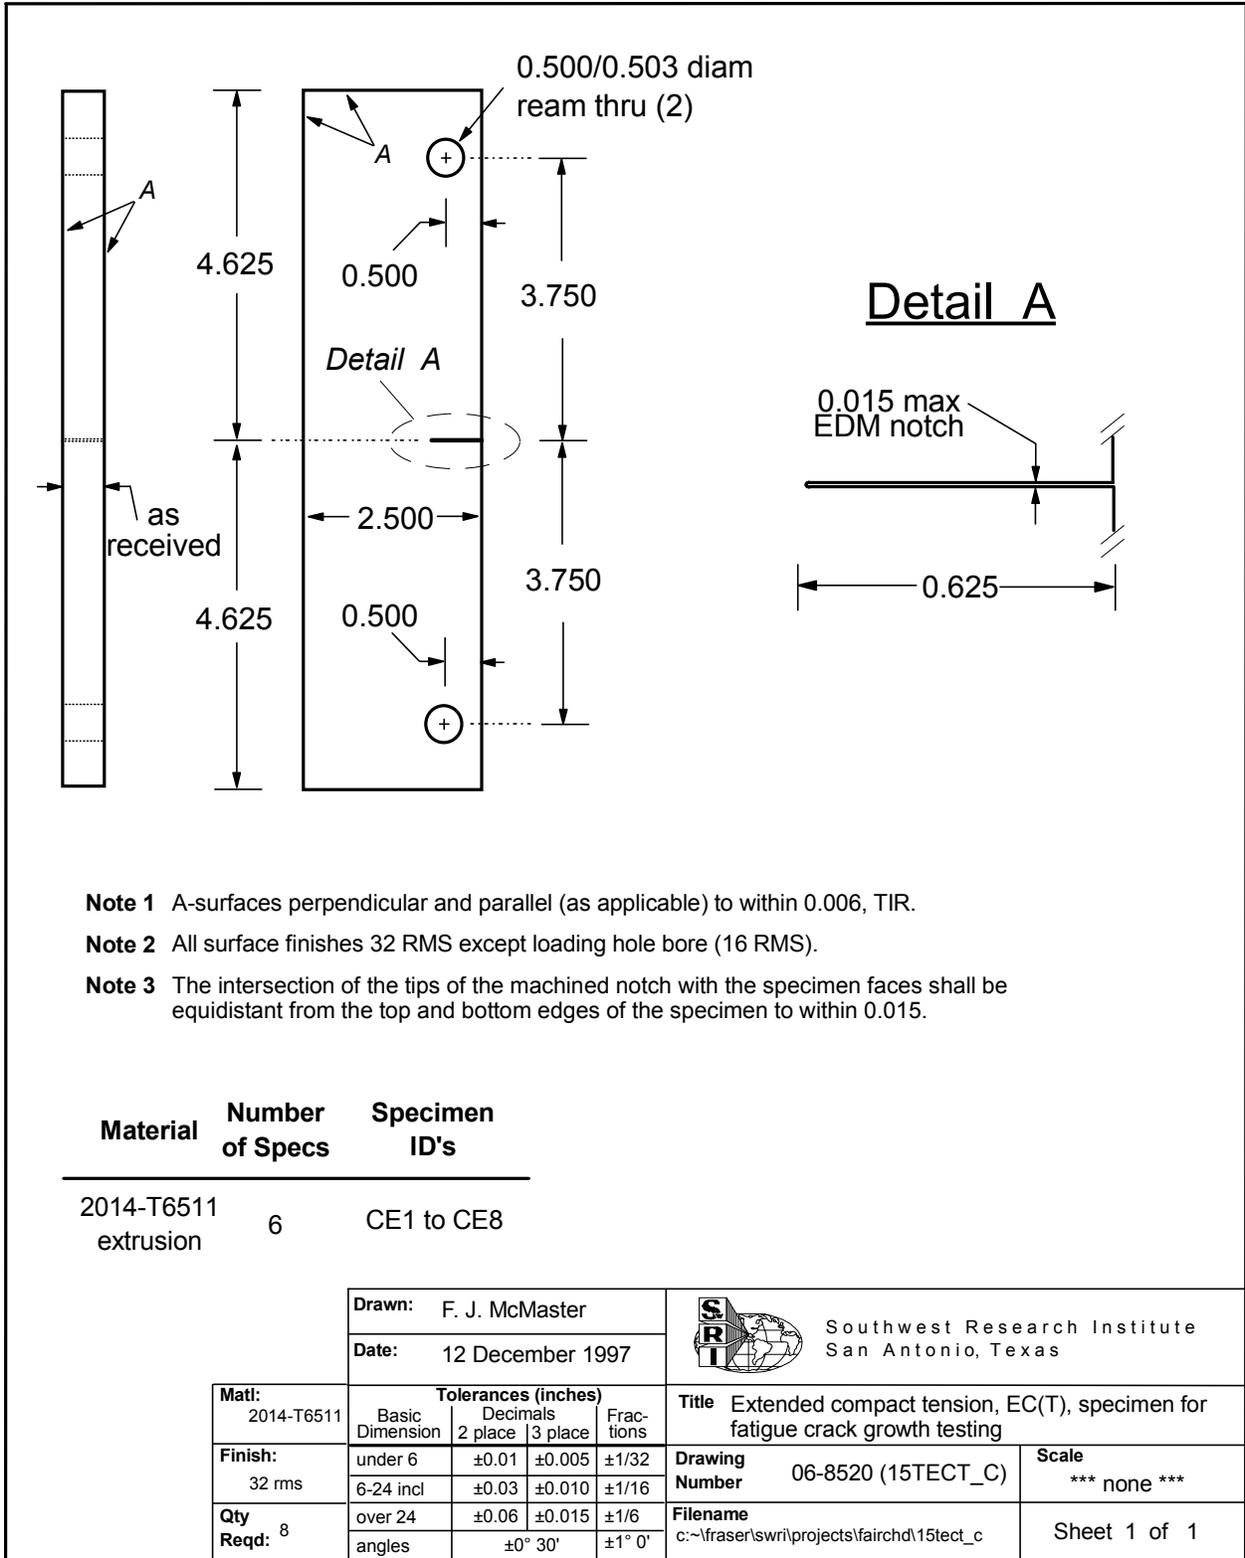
Design for the 1-T Plan Geometry Eccentrically Loaded Single-Edge Crack Tension Specimen for Fatigue Crack Growth Studies
